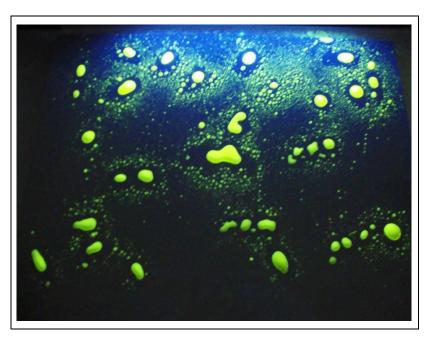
Test contamination adhering to the test piece illuminated by a handheld UV lamp
